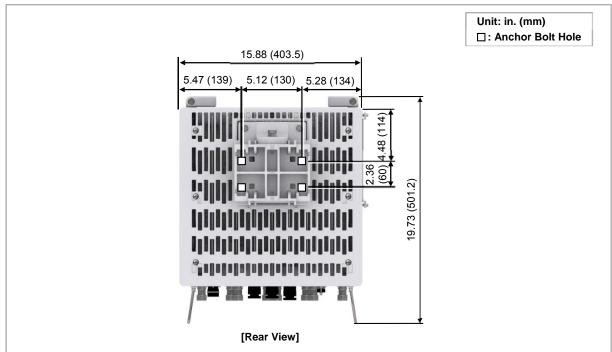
RRH marking dimensions\_1 Sector Wall Type (Side Installation)
